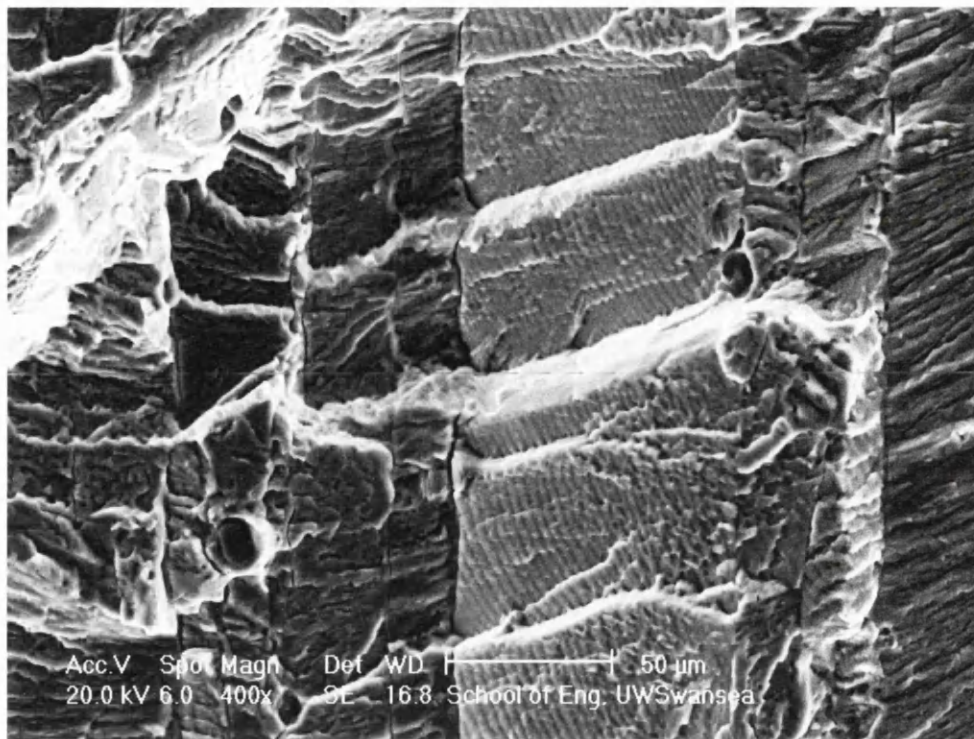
Corner edge crack initiation in as-machined centre hole specimen.
